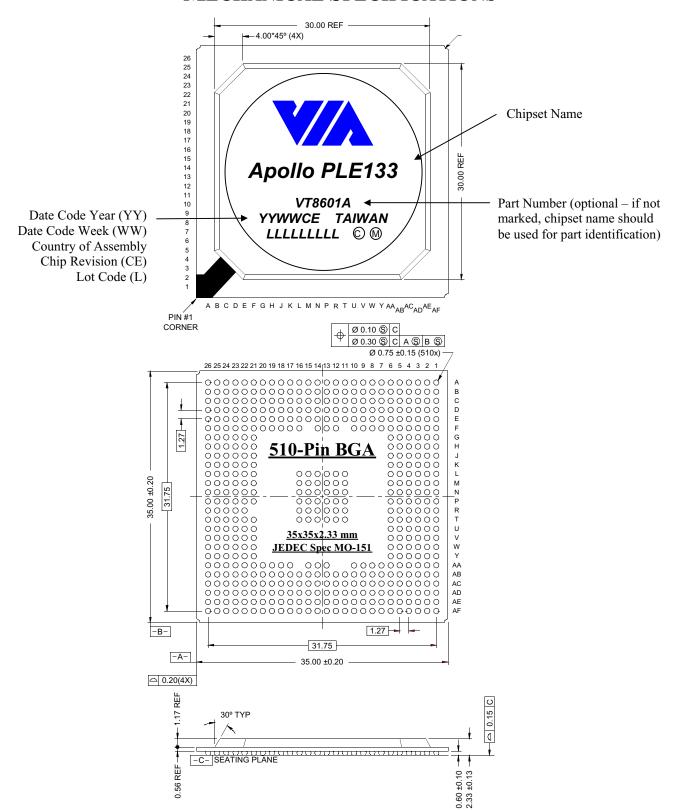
Mechanical Specifications - 510-Pin Ball Grid Array Package
